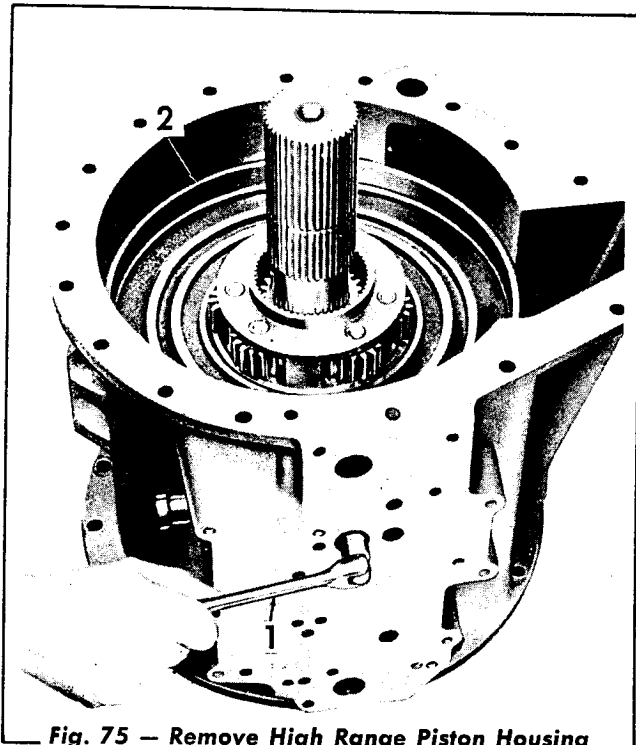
Remove High Range Piston Housing Retainer Capscrew
